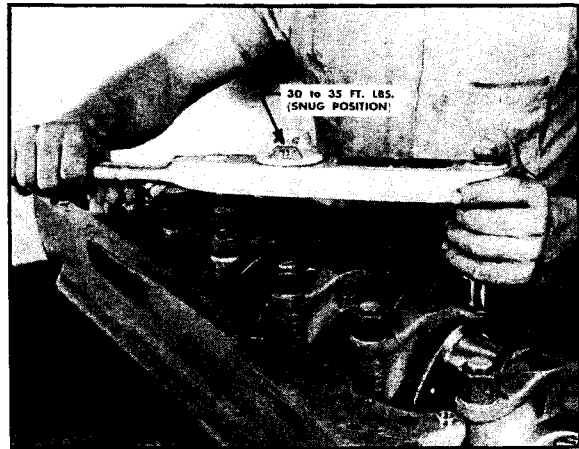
Snug tighten to 30-35 ft. lbs.
